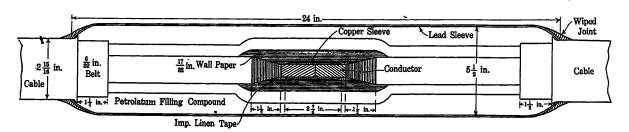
Construction and Dimensions of Impregnated Paper Joint Three-conductor, 300,000-cir. mils, sector, conductor 25,000-volt cable
